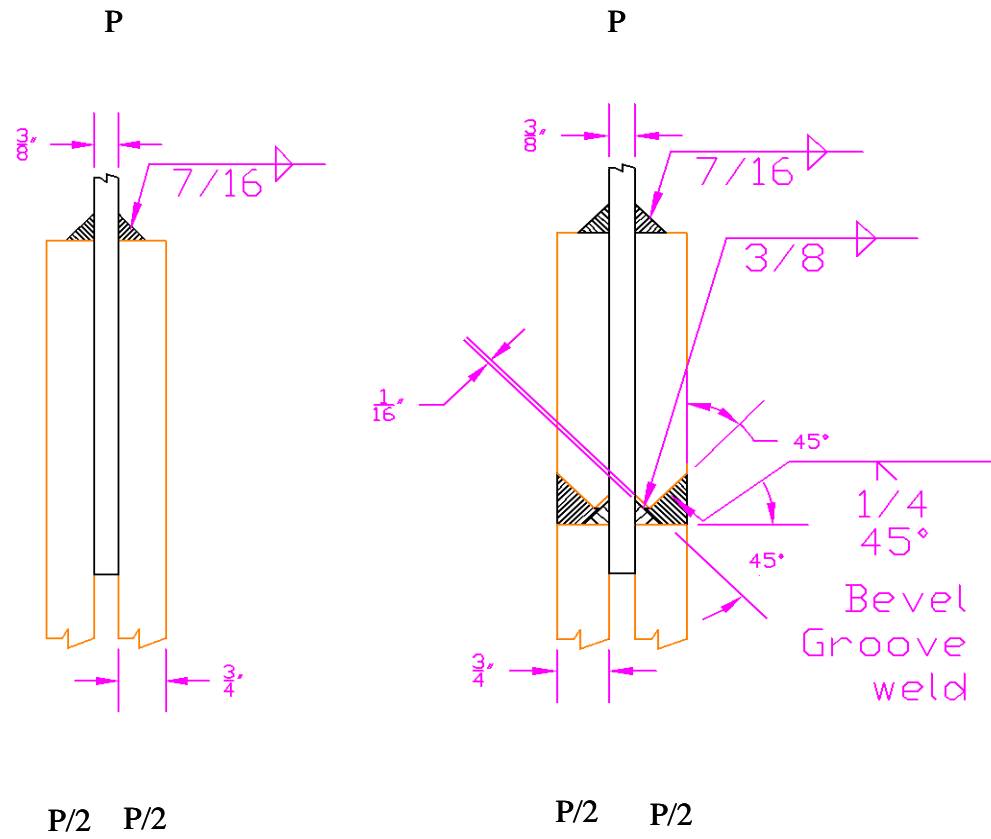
Weld Joints (a) Weld Joint 1 specimen (b) Weld Joint 2 specimen
